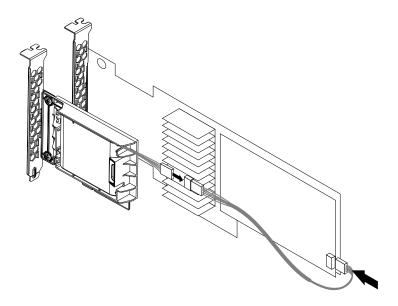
Connecting the cable of the super capacitor module to the RAID card
